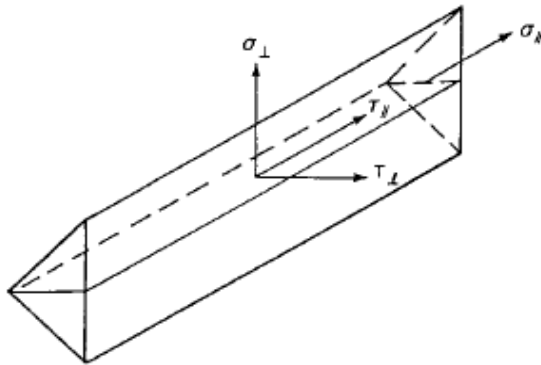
Stresses on the Throat Section of a Fillet Weld
